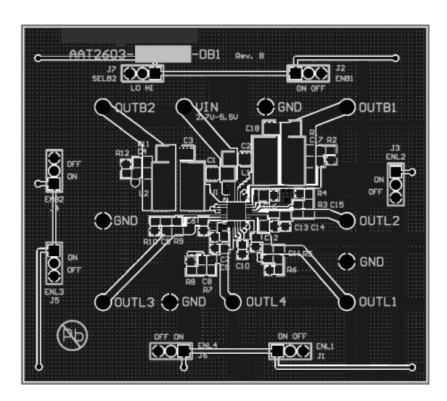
AAT2603 Evaluation Board Top Side PCB Layout.
